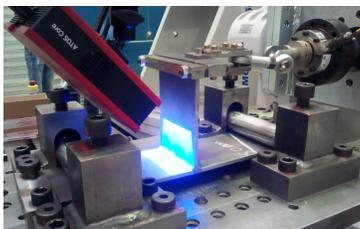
Fatigue test on a T joint specimens, DIC is used to detect crack initiation
